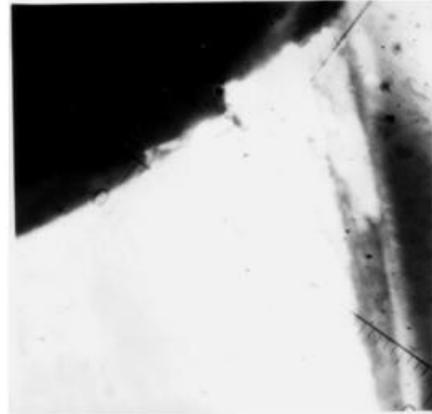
Deposits on cutting edge after turning with $v = 350\text{m/min}$
